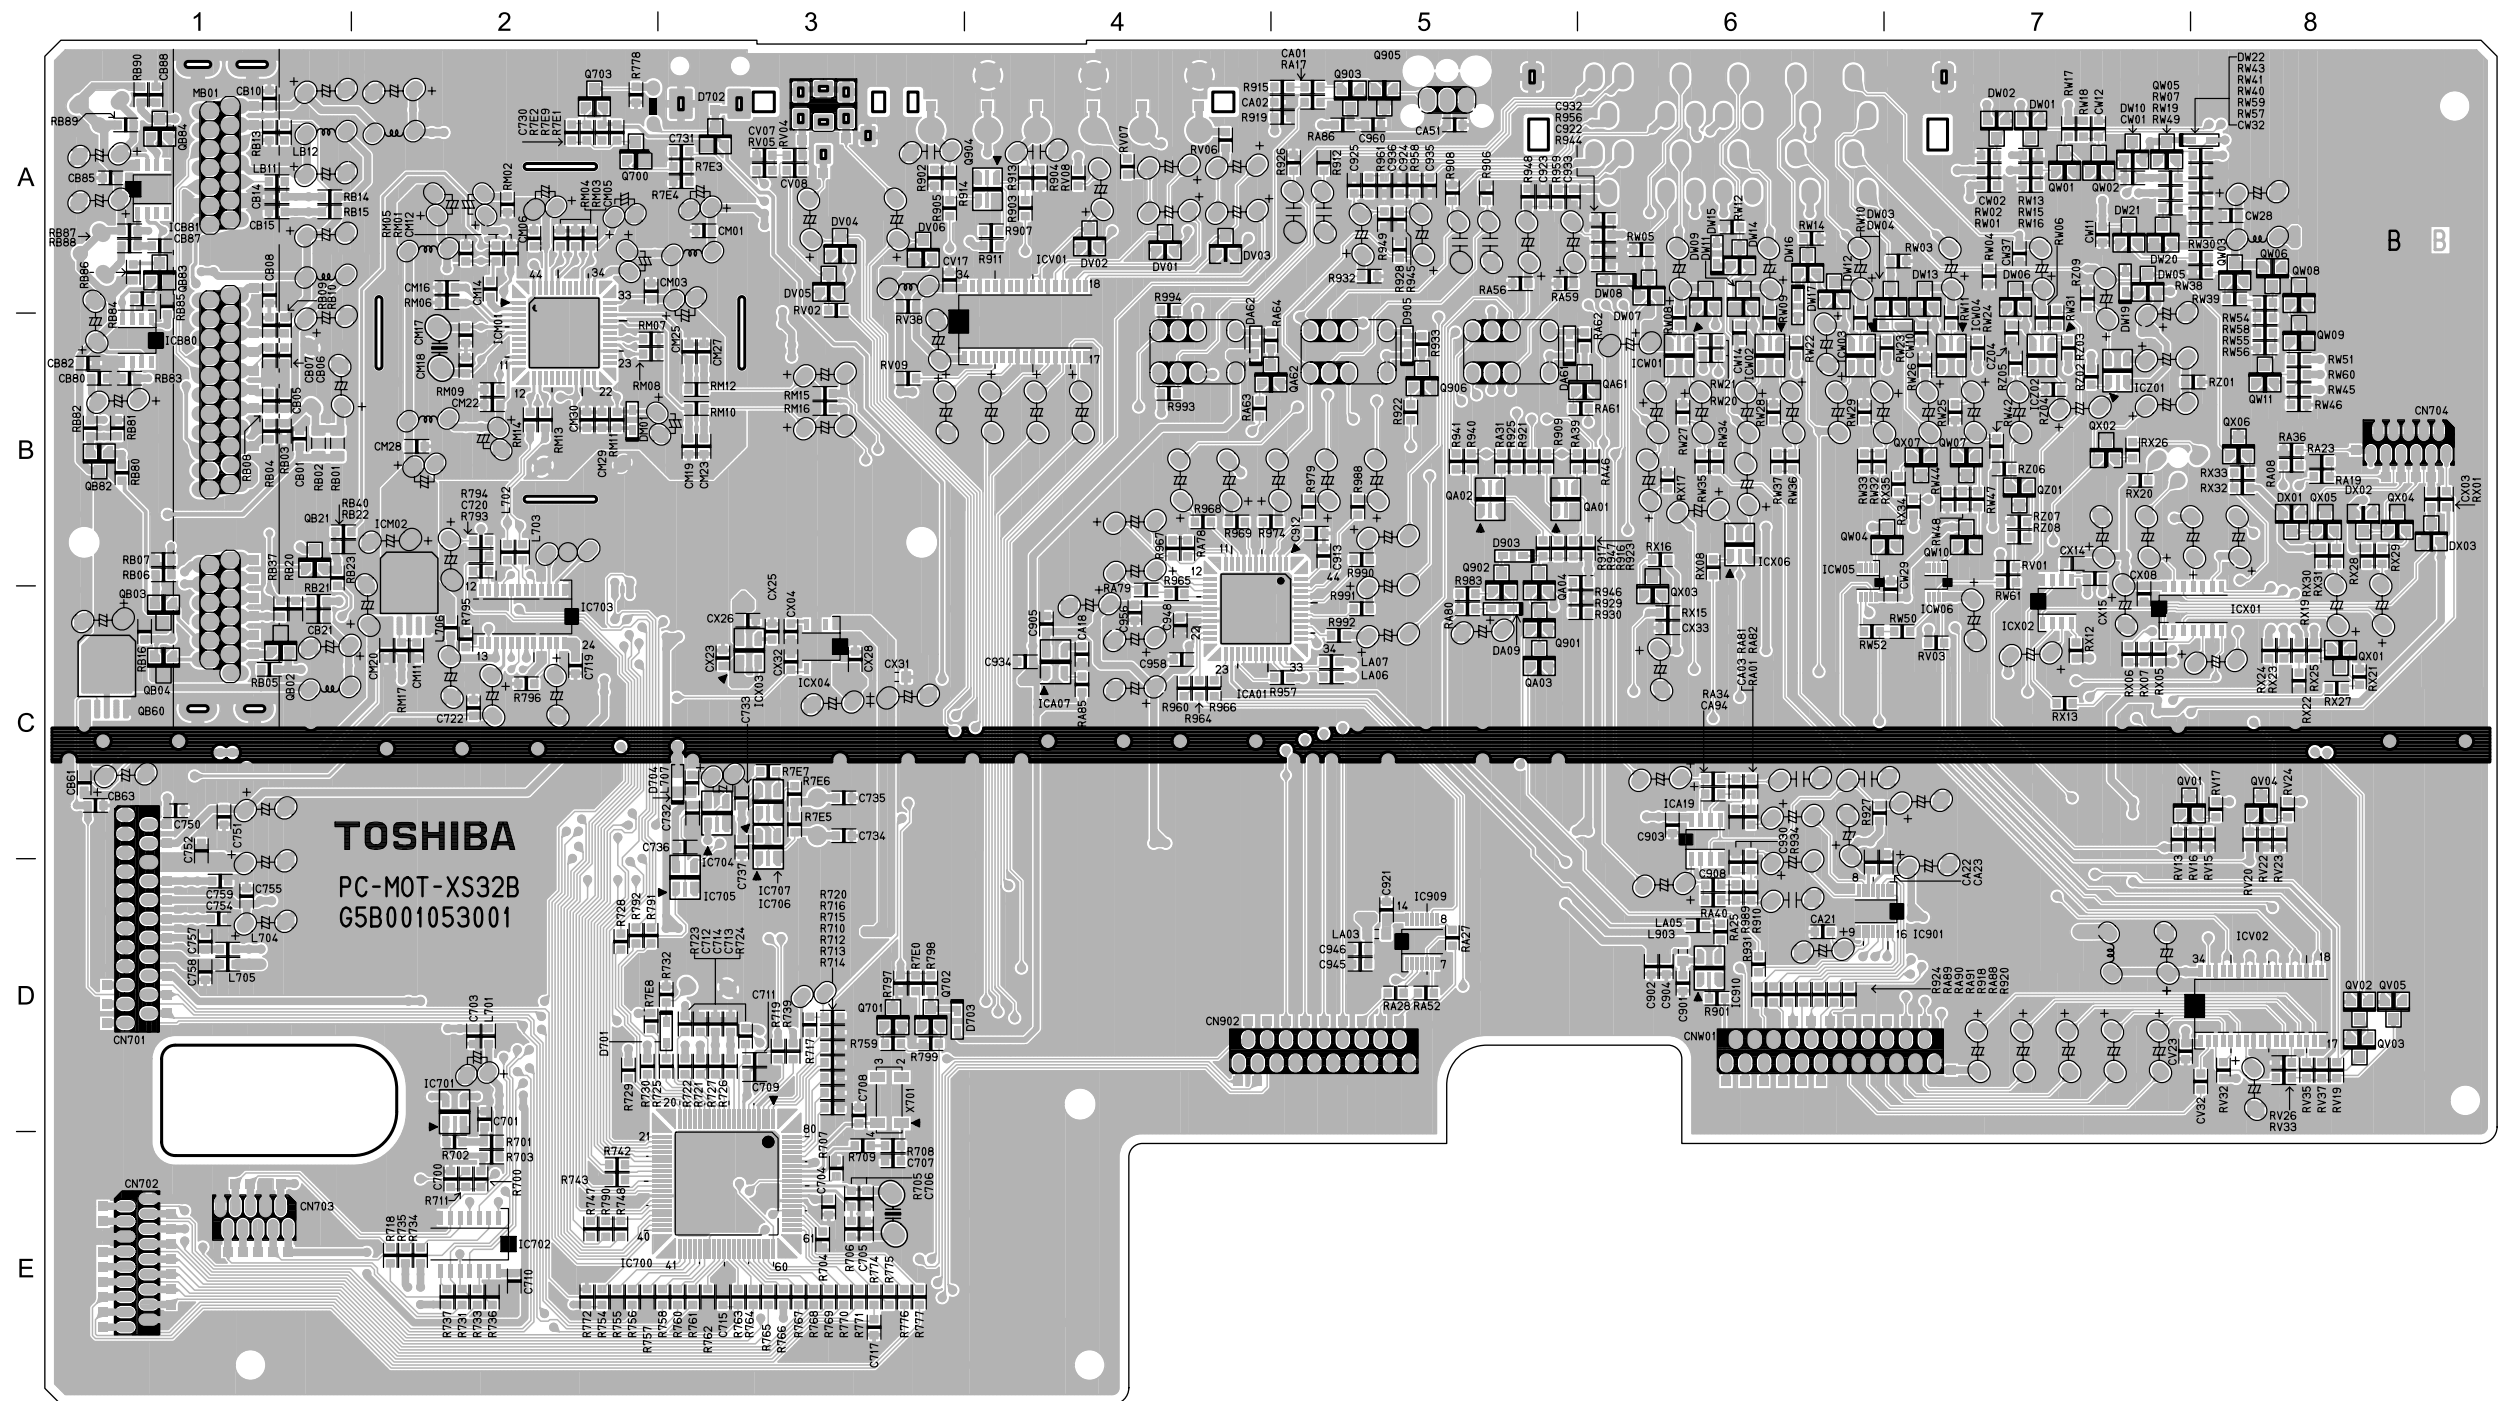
EU05 Mother PC Board (Bottom side)
